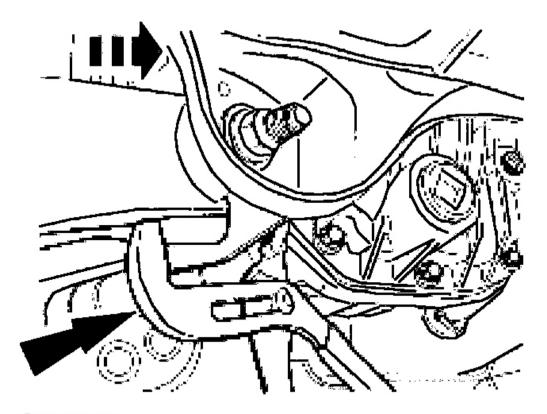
Moving Lower Arm Inward To Increase Camber Courtesy of FORD MOTOR CO.
